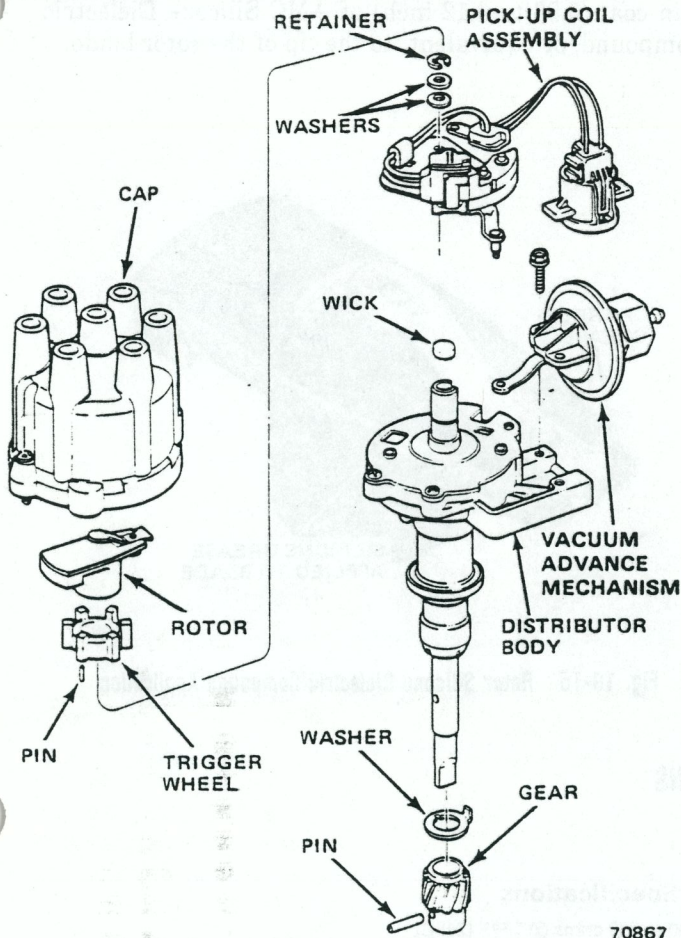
G-15 SSI Distributor Components—Six-Cylinder Engine
